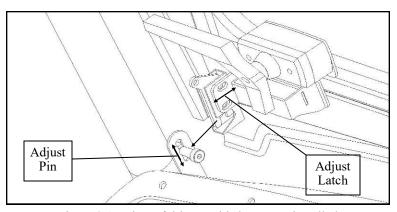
View of driver's side bottom uninstalled Windshield is in fully closed position
